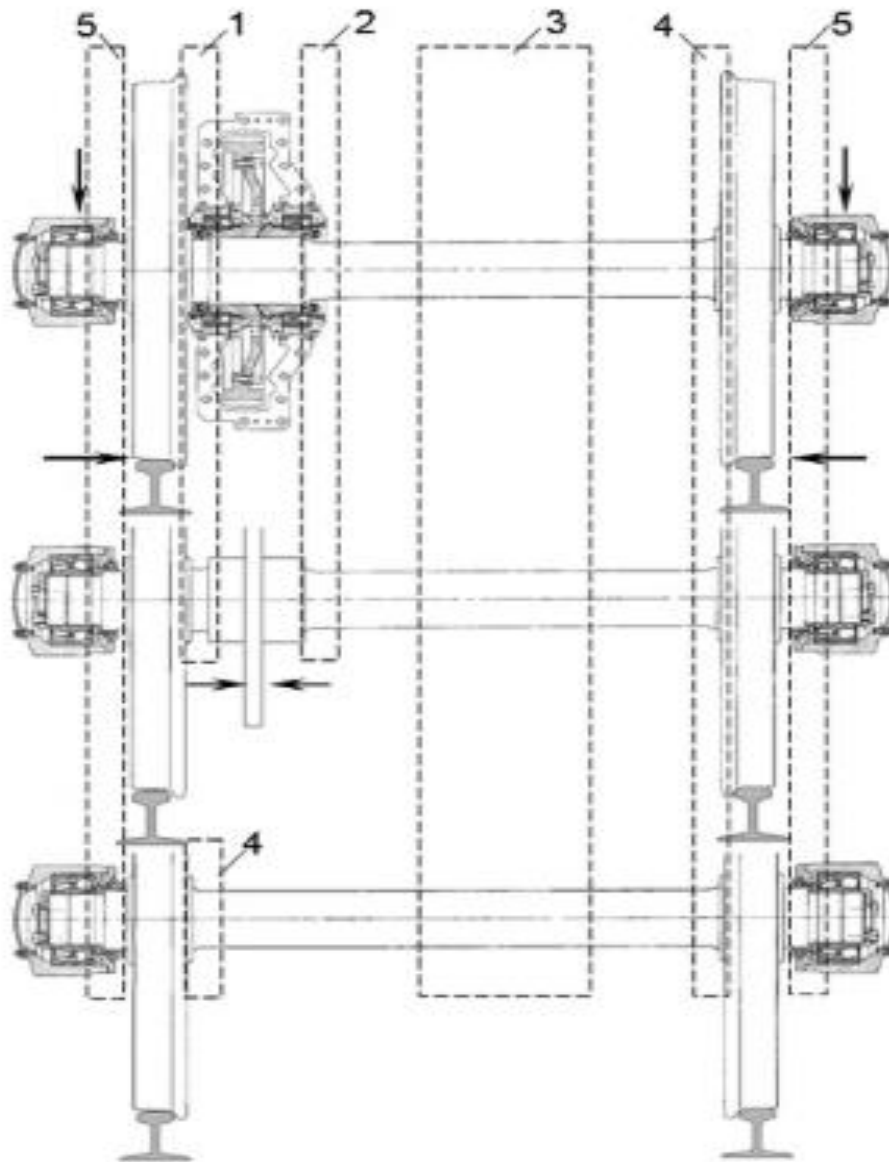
Distribution of fracture places in the railway traction shafts and axles
